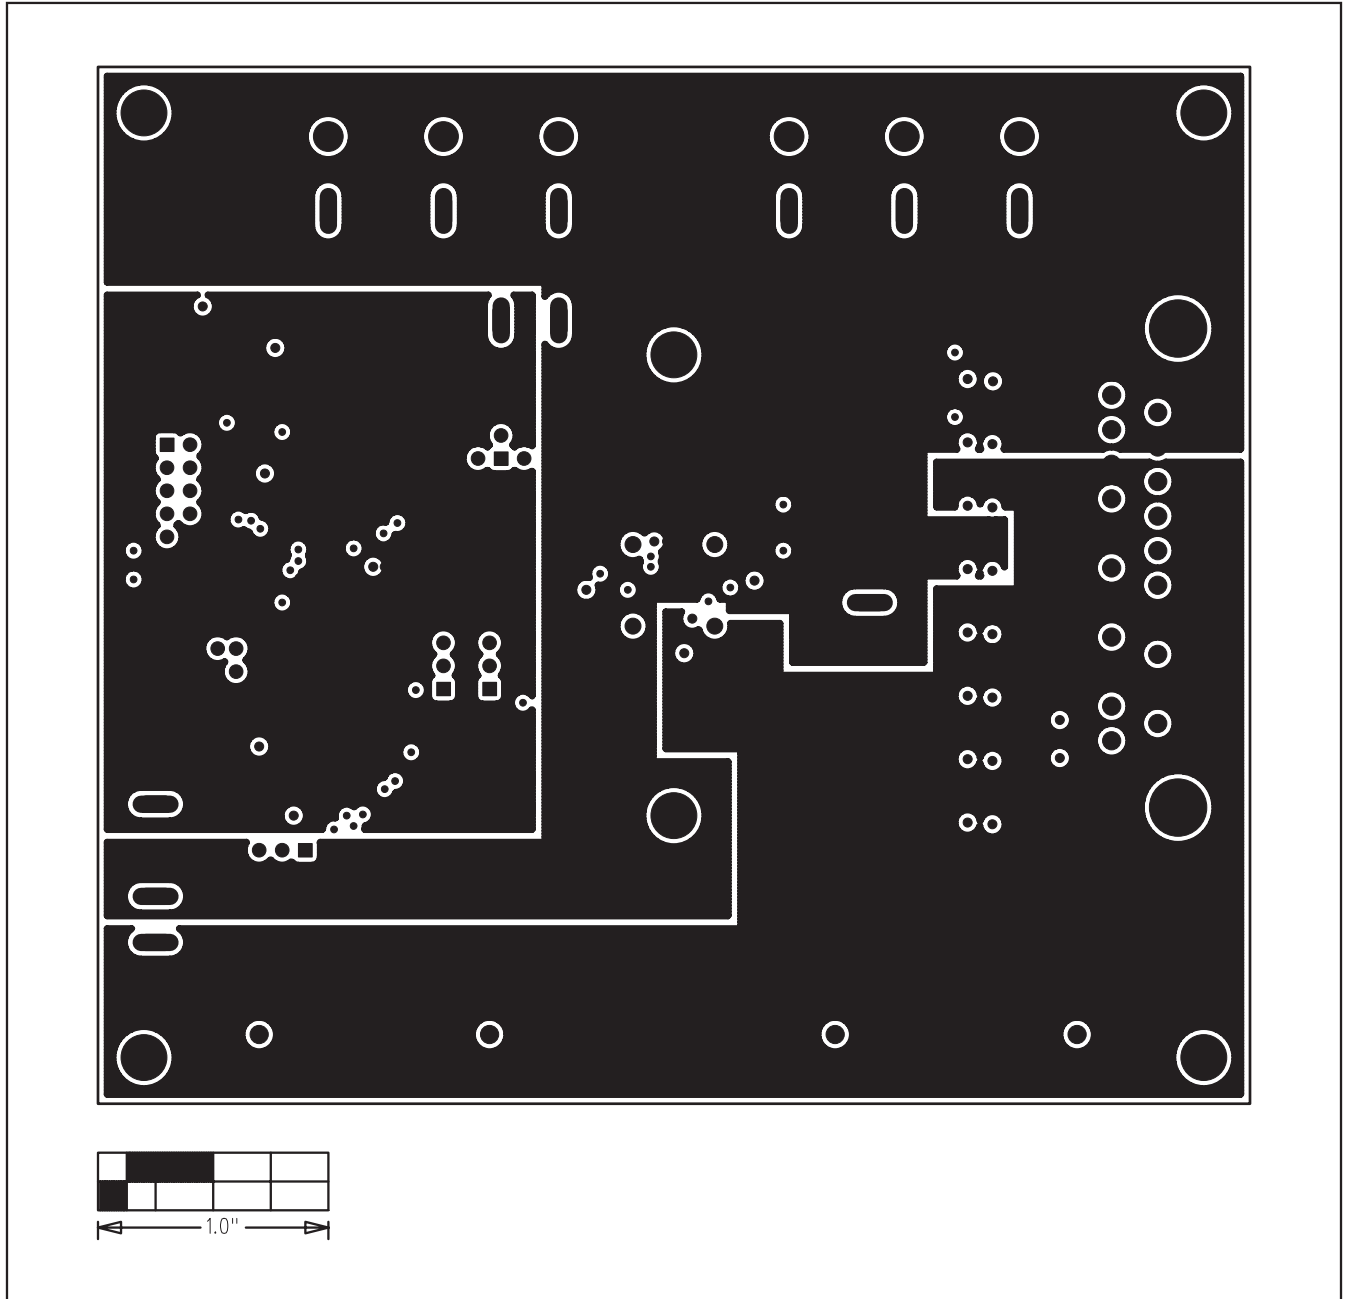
MAX9597 EV Kit PCB Layout—Inner Layer 2
